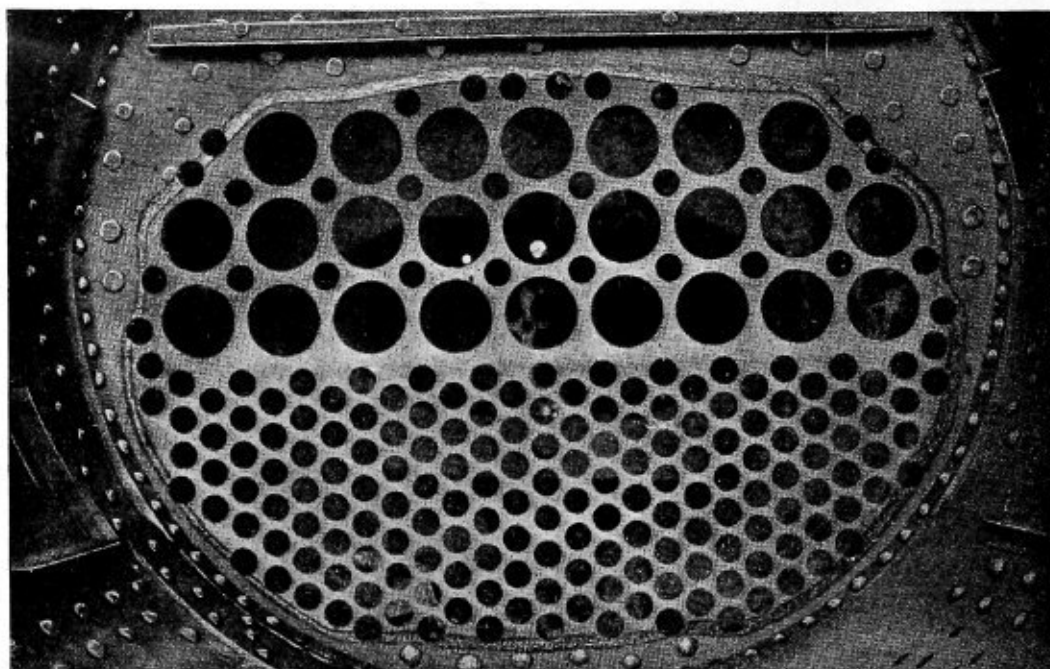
Front Flue Head Welded in by Bare Arc Process
